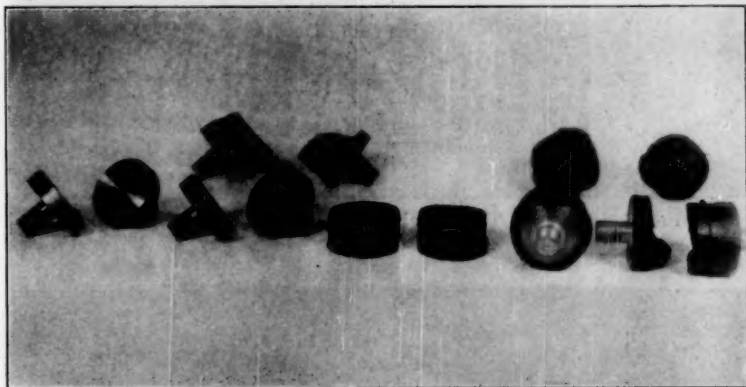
Views of Test Specimens, Showing Individual Metal Parts, Metal Test Pieces Cemented, Rubber Cylinders and Finished Test Specimens Before and After Testing.
